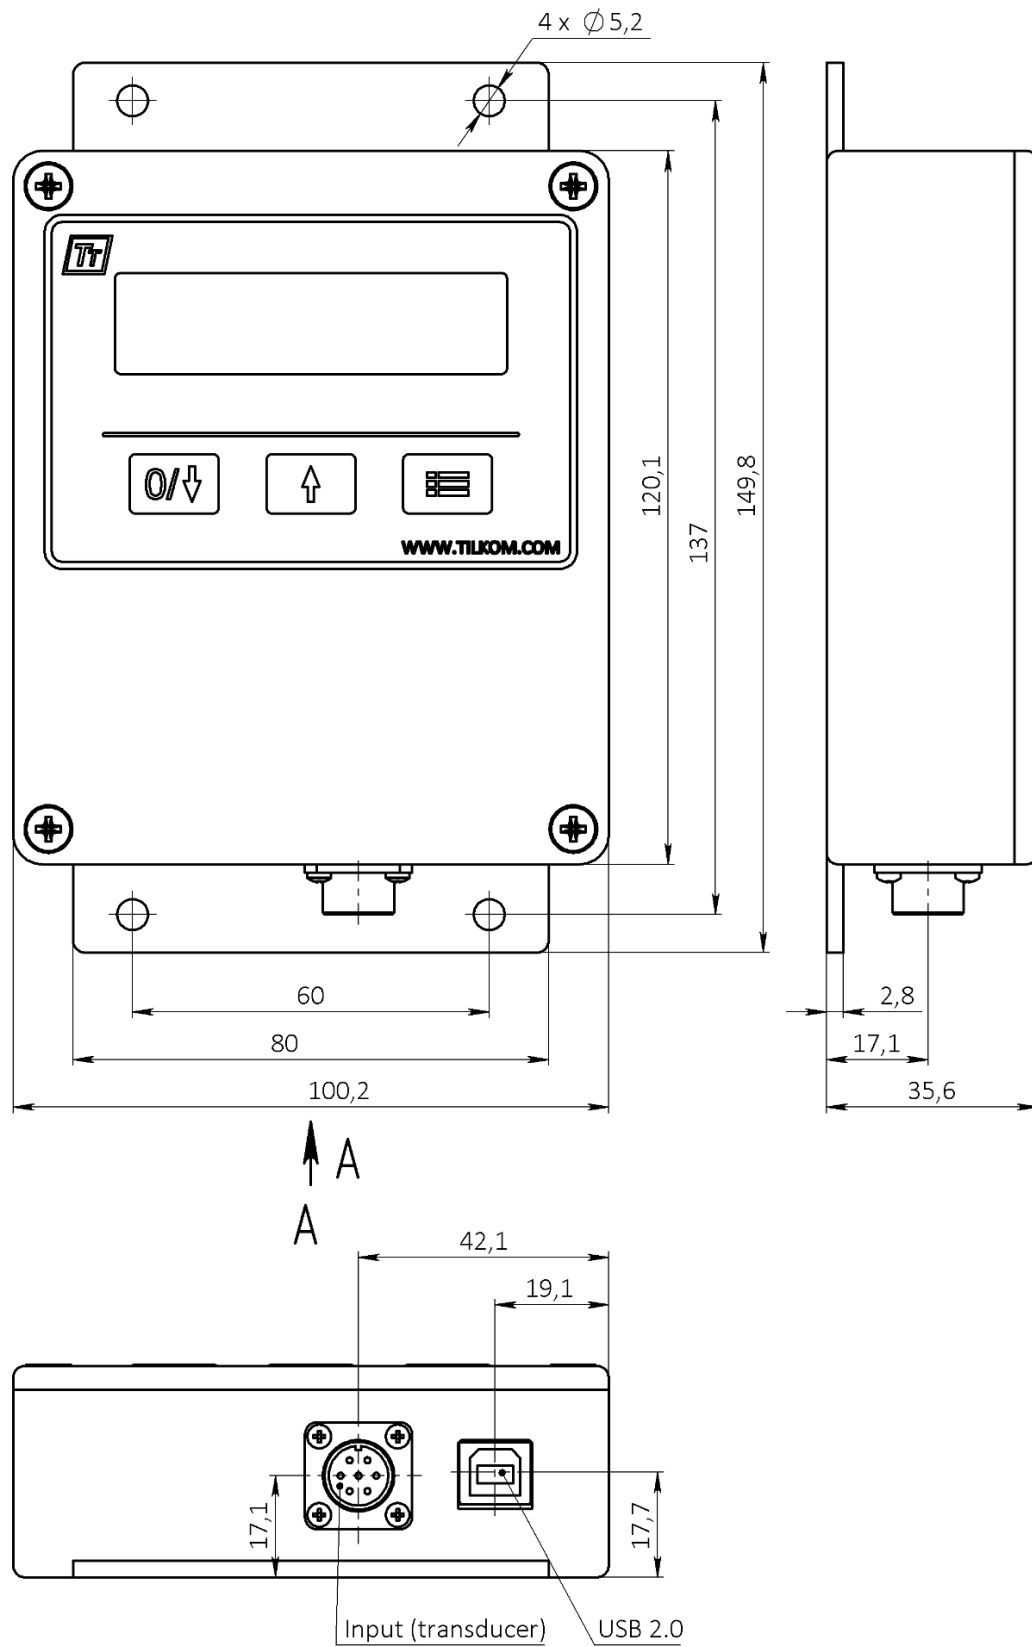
M56.02 telemetry module with the mounting flange. Overall and installation dimensions, mm.
